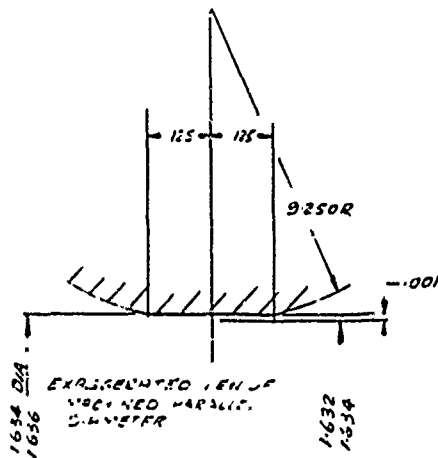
DRAWING OF DIES USED TO COLD SWAGE GUN BARRELS IN MULTIFLOW MACHINE
